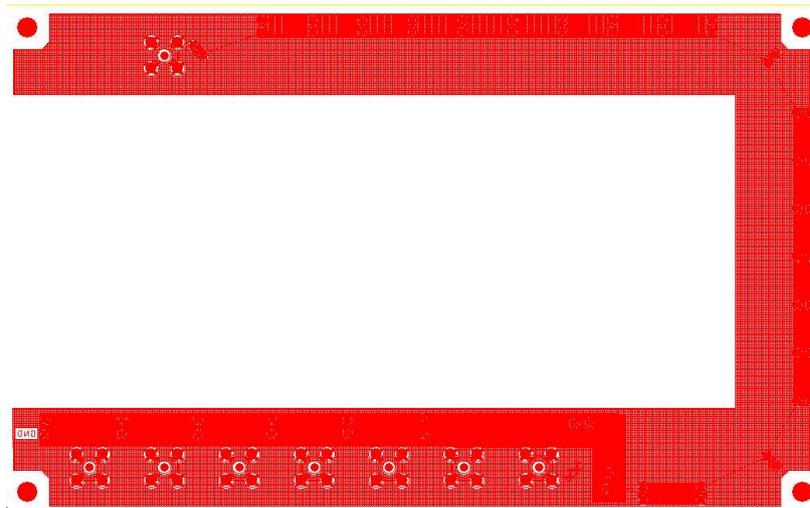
The Lenz's Law Bare Board (Bottom View)
